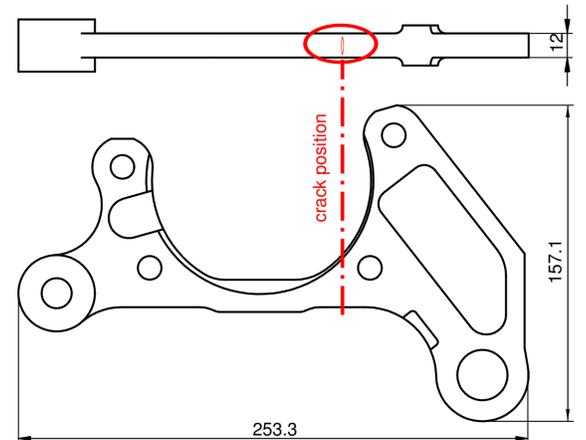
Front and top view of the sample, showing dimensions (in mm) and crack position.
